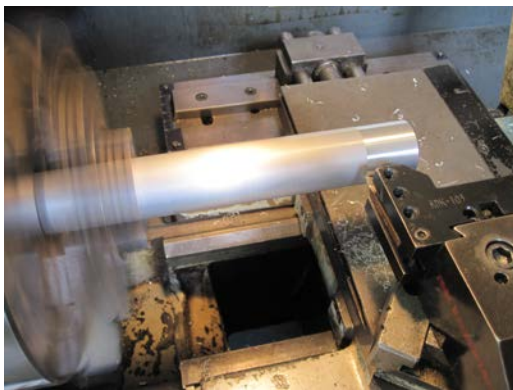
Turning the seat tube shim to fit snugly inside the bamboo.
